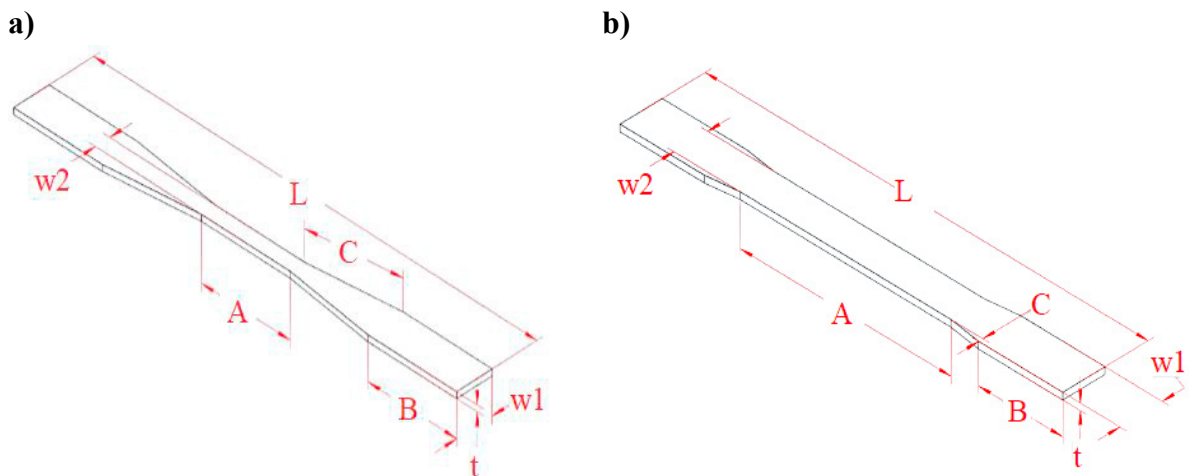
The test specimen, a) specimen for yield test, and b) specimen for fatigue test
